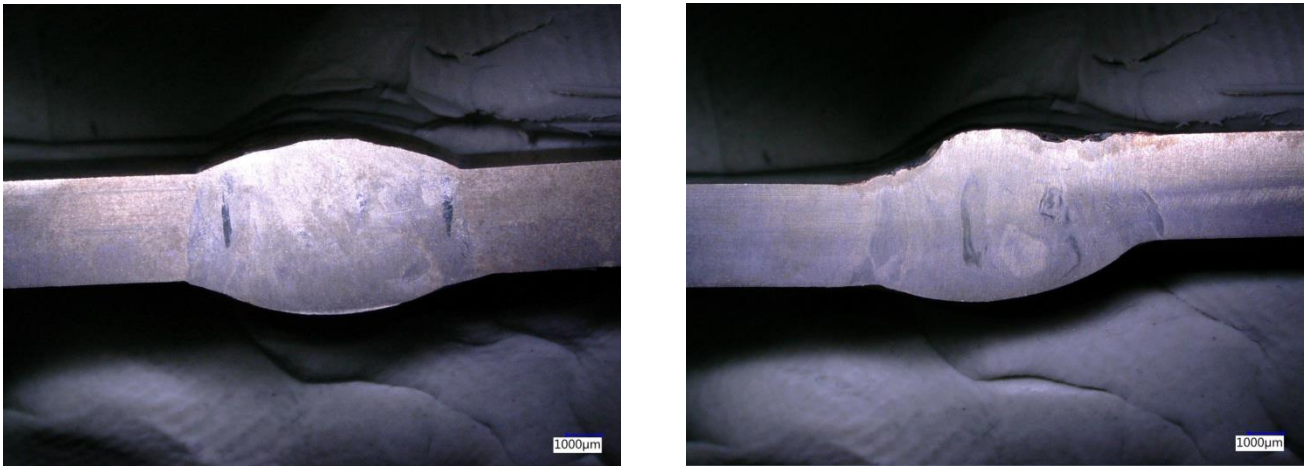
Overview of welds. Left the weld welded with backing gas; right the weld welded without backing gas. Magnification 20x. On the top of the sample the inside of the pipe can be seen. Right the rough surface of the backside of the weld without backing gas can be seen.
